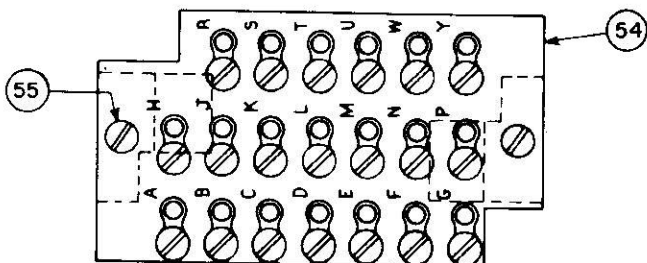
TERMINAL BOARD ASSEMBLY.
